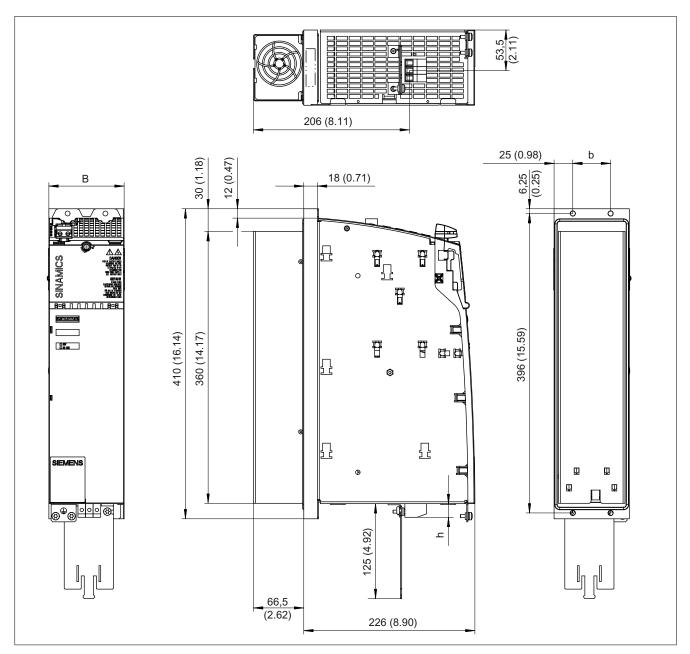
Dimension drawing of 16 kW Active Line Module with external air cooling, all dimensions in mm and (inches)
